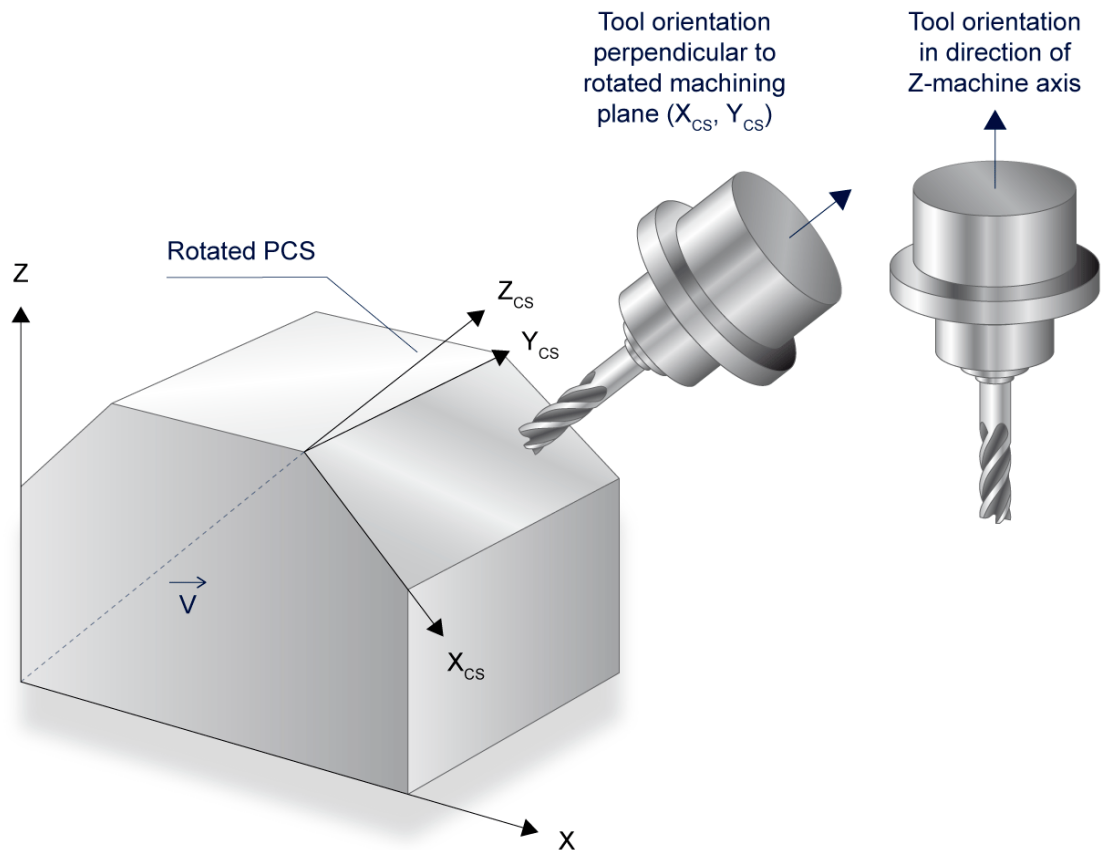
Tool aligned perpendicularly to the X-Y machining plane
